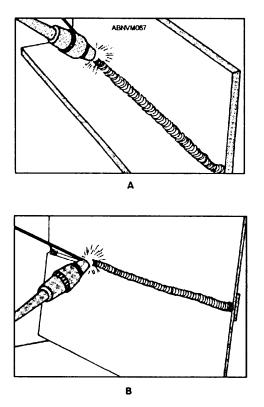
Welding a fillet and butt joint in the horizontal position.
